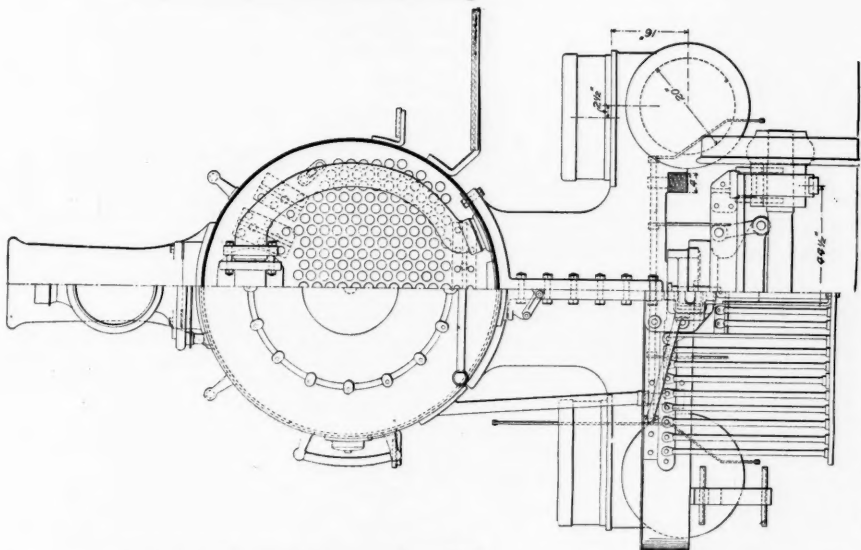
Half Front Elevation and Half Cross-Section through Smokebox.
